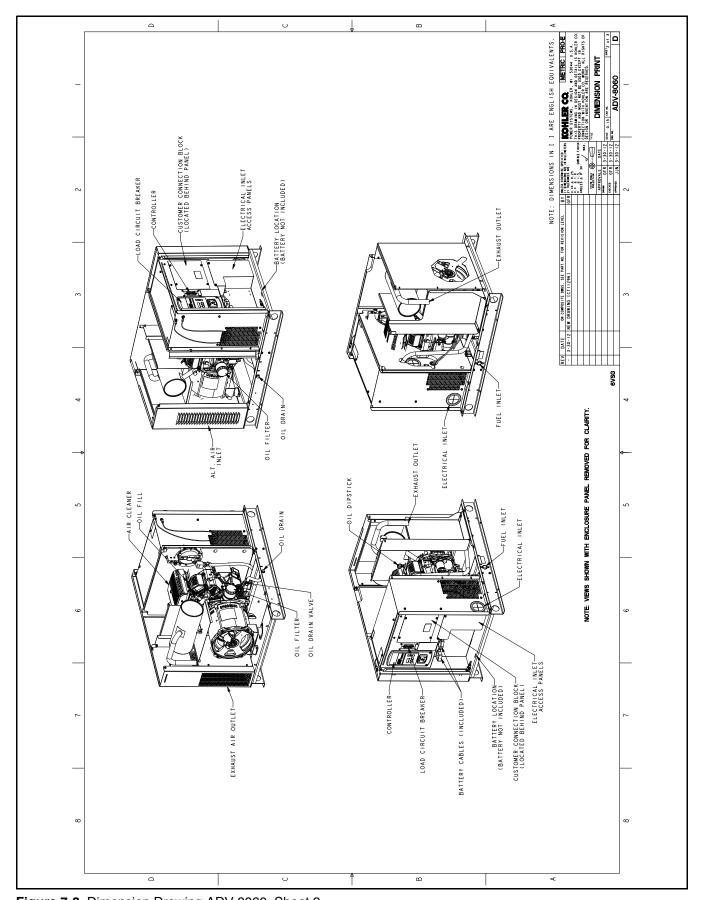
Dimension Drawing ADV-8060, Sheet 2
